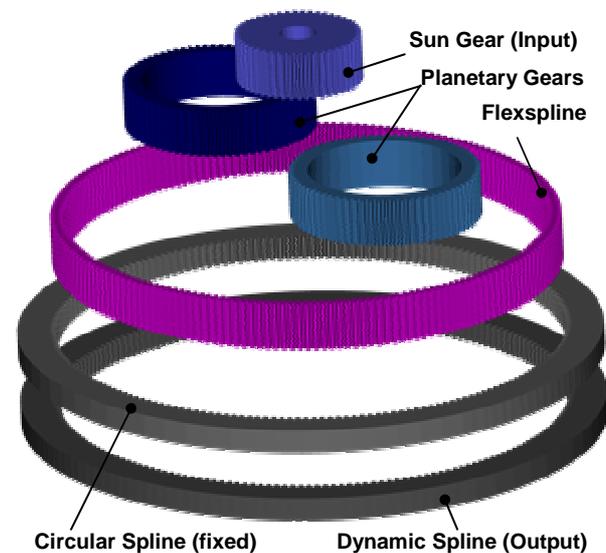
Component setup of a Micro Harmonic Drive gear rack.
